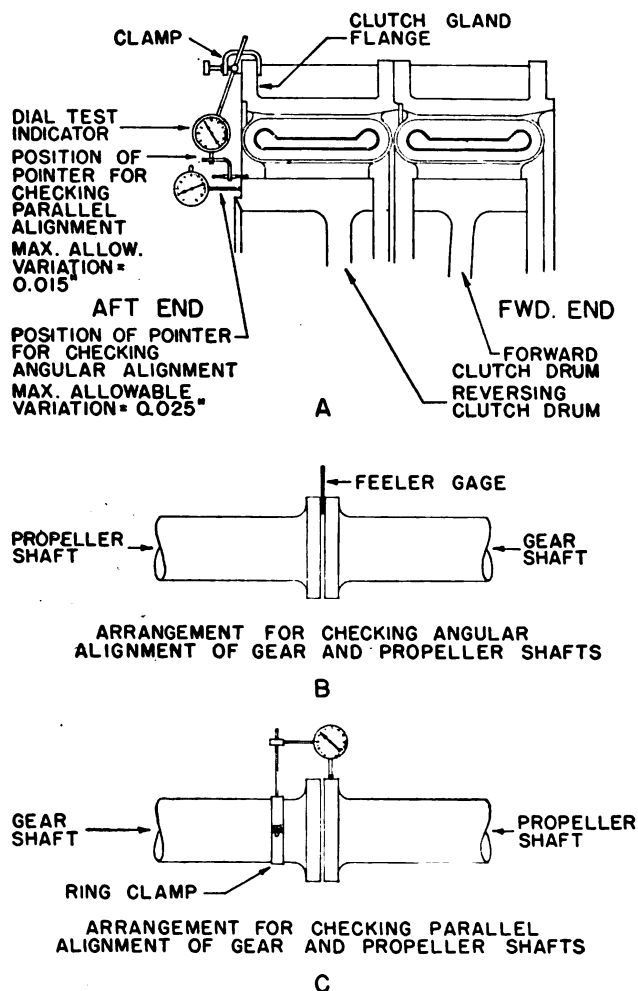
Checking angular and parallel alignment of propeller shafts.
